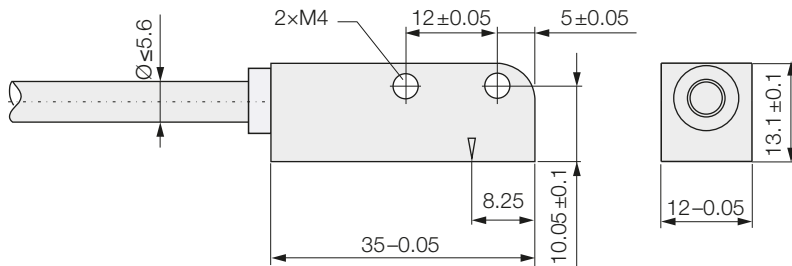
BML-S1F_-A/Q_-_-M_0-0-...-KA/KD/KF_ _ construction
